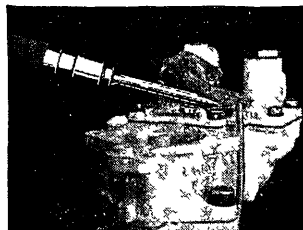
Anti-percolator adjustment. Bend anti-percolator rocker arm until there is a clearance of .005" to .015" between rocker arm and pump arm
